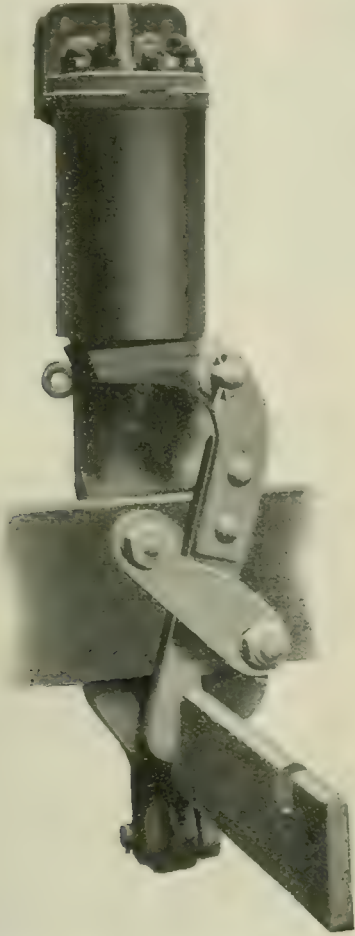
DETAILS OF CHECK LOCK MAGNET AND LOCKING BARS FOR POINT LEVERS.
